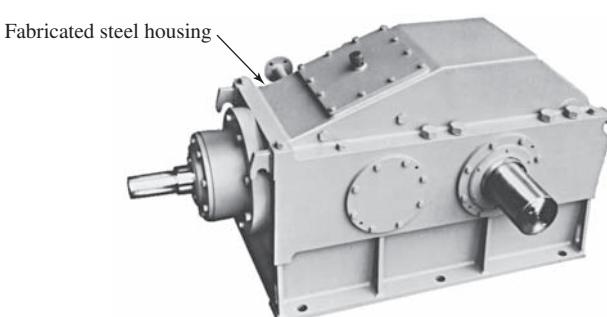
Heavy-duty right angle gear reducer (Sumitomo Machinery Corporation of America, Teterboro, NJ)
